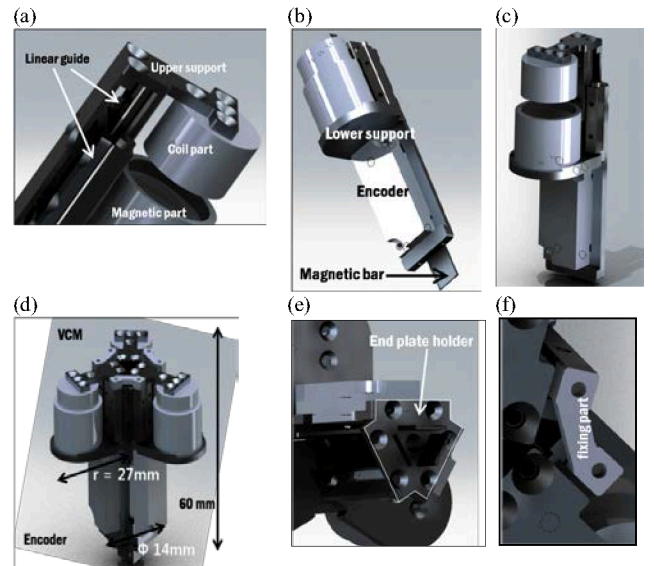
The 3D modeling of the actuating module ((a) – (c)) and assembly of the module (d) with (e) end plate holder and (f) fixing part.
